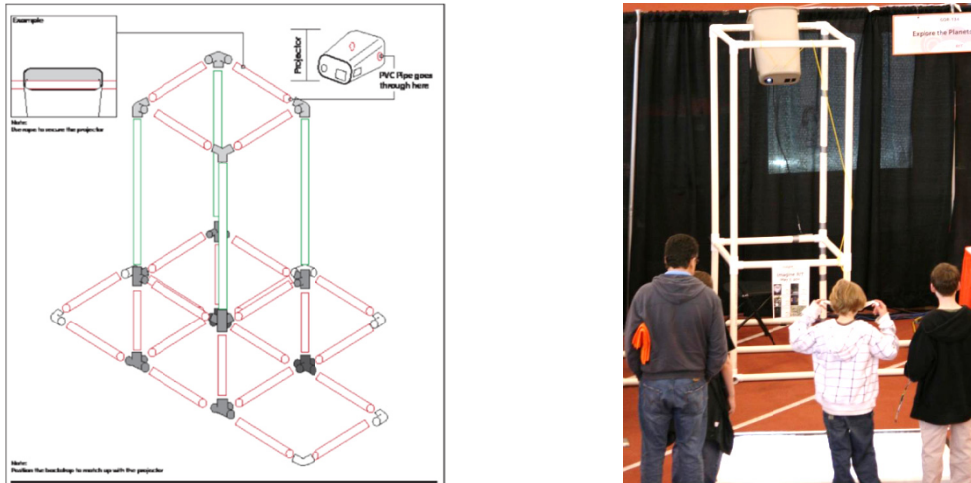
(left) What started out as a structural design became a (right) successfully functioning Planeterrainium.
